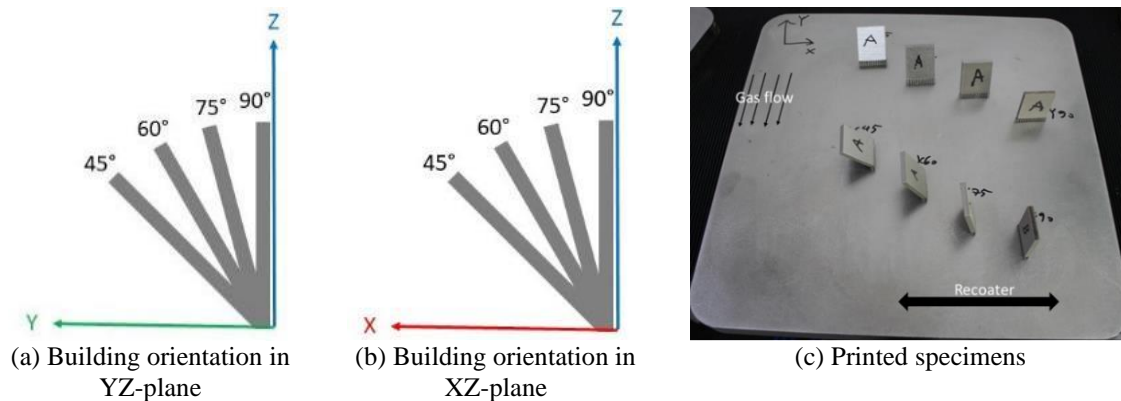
Flat specimens on the building plate, on YZ and XZ planes
